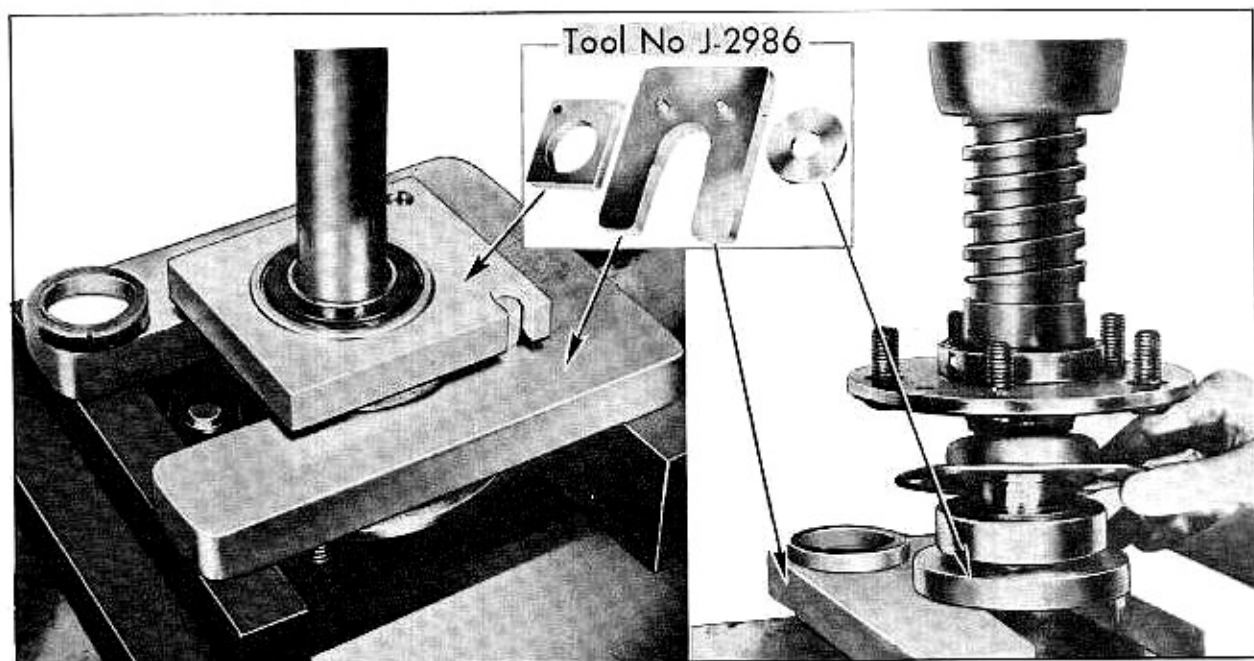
Removing and Installing Rear Axle Shaft Bearing
